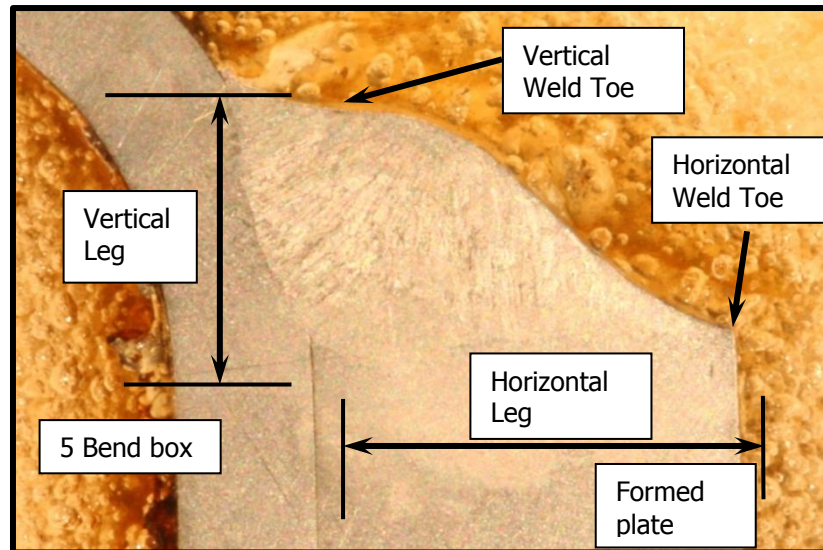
Weld toe measurement locations for specimen 6.
